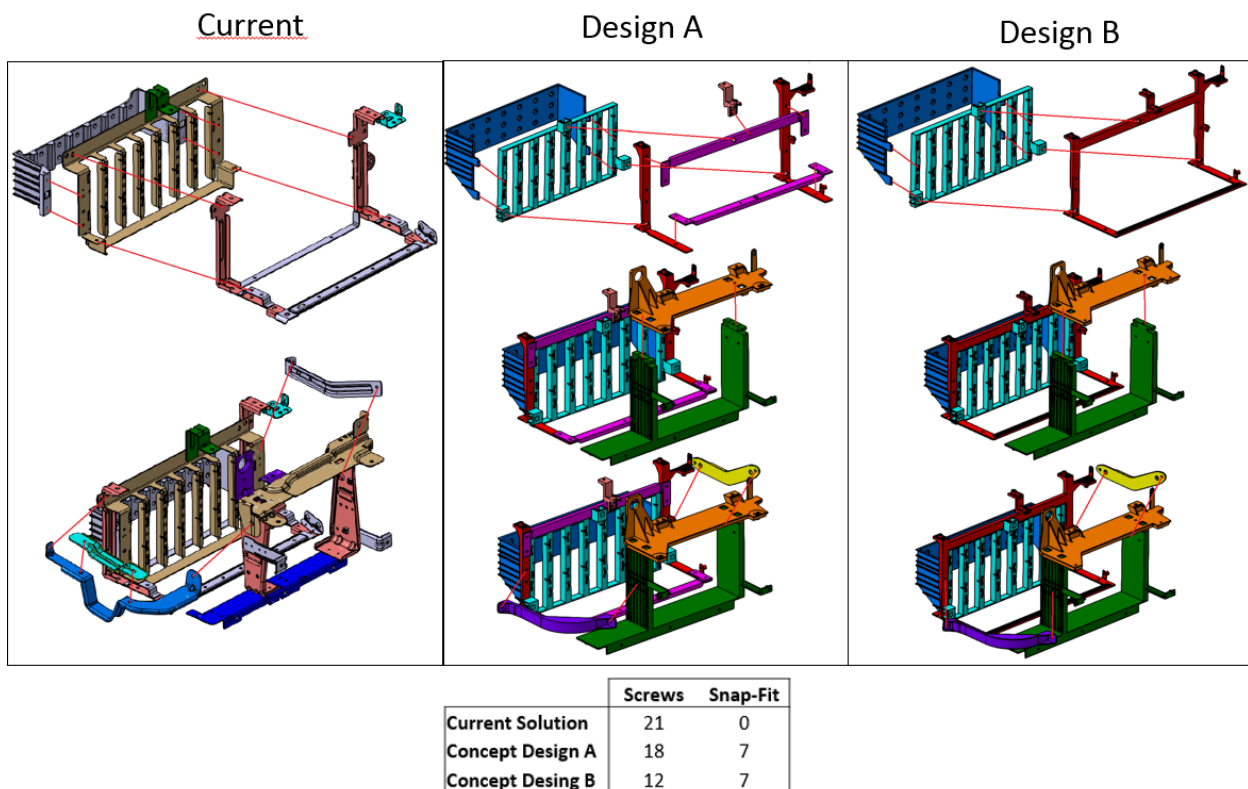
Exploded views showing the assembly of the current solution and the two new design options.
